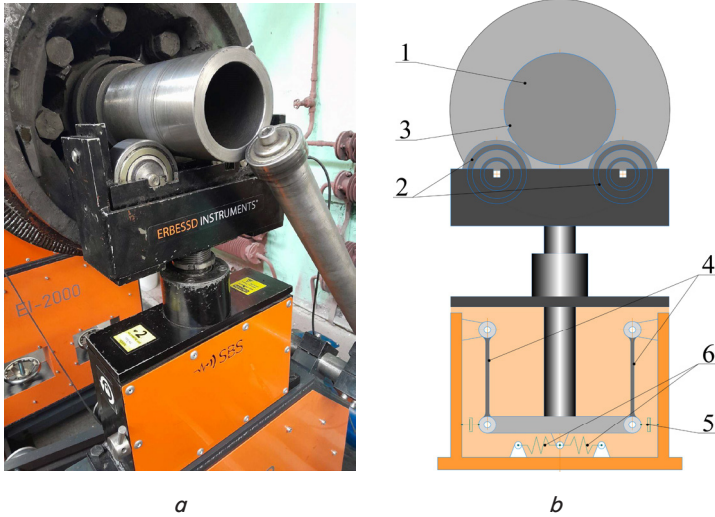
Floating supports of the balancing machine: *a* – photograph of the floating support; *b* – rotor installation scheme on supports: 1 – balanced rotor; 2 – support rollers; 3 – groove-damage on the rotor support surface; 4 – pendulum support; 5 – dampers; 6 – springs
